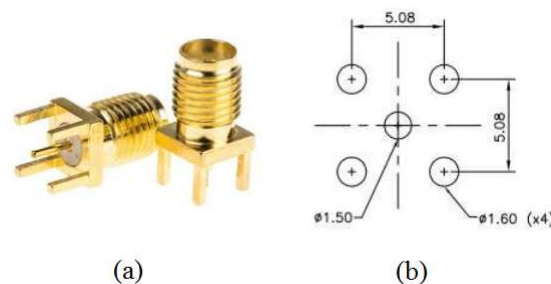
(a) Photo of the chosen SMA connector. (b) dimensions in (mm) of the chosen SMA connector.
